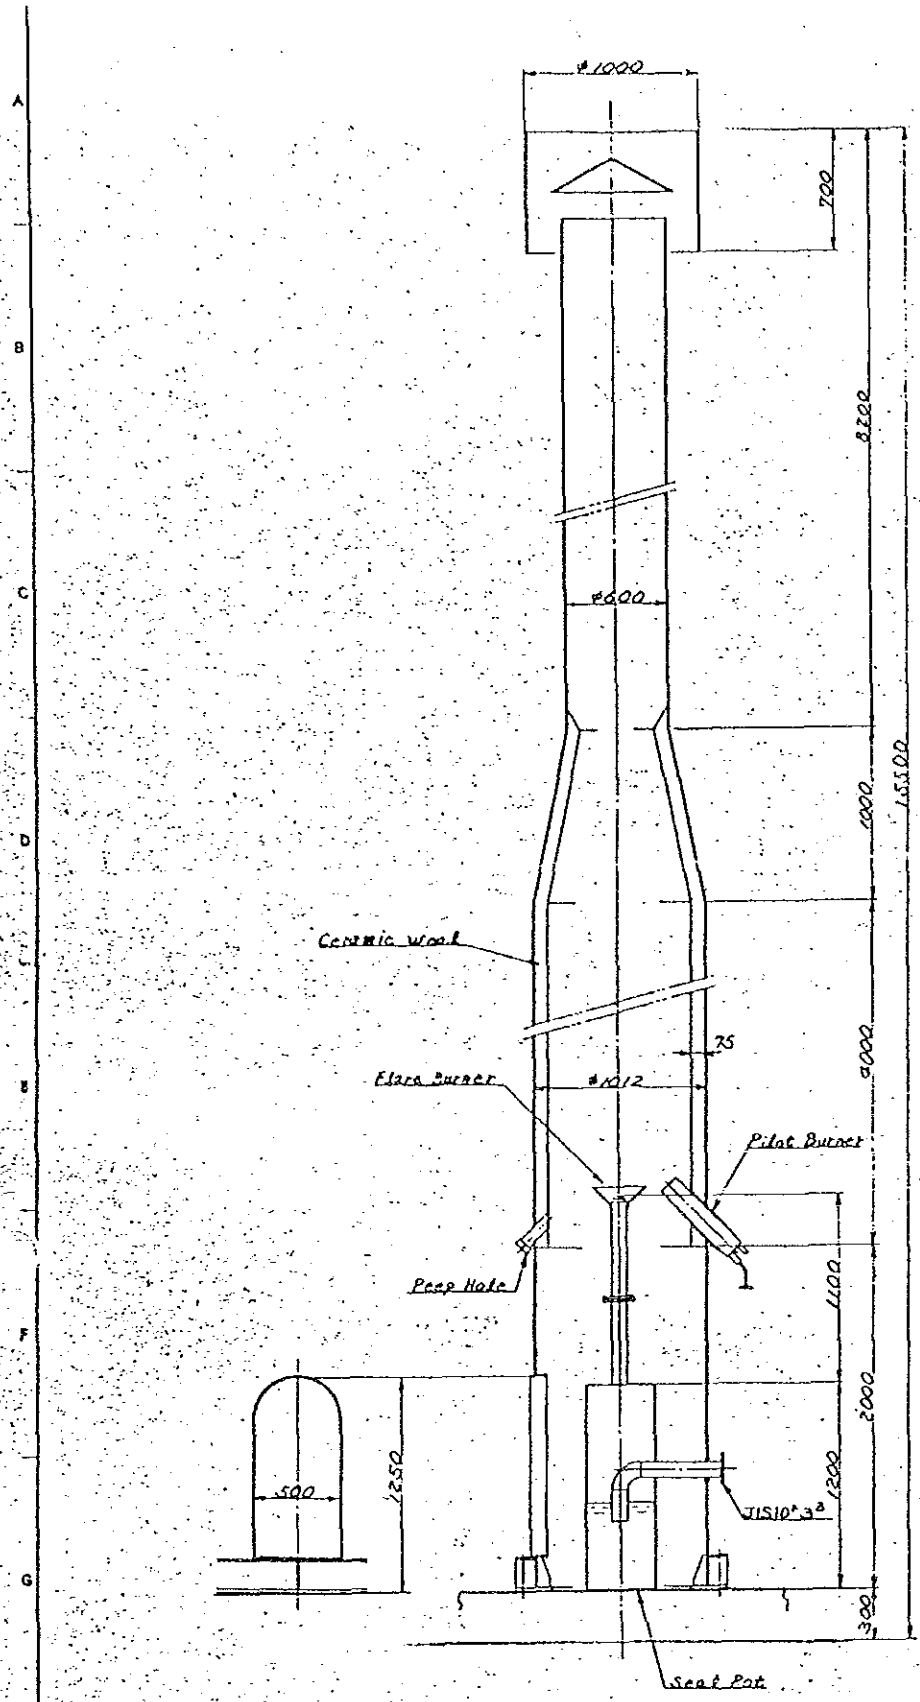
Assemble drawing of produced gas filtration system(3)
